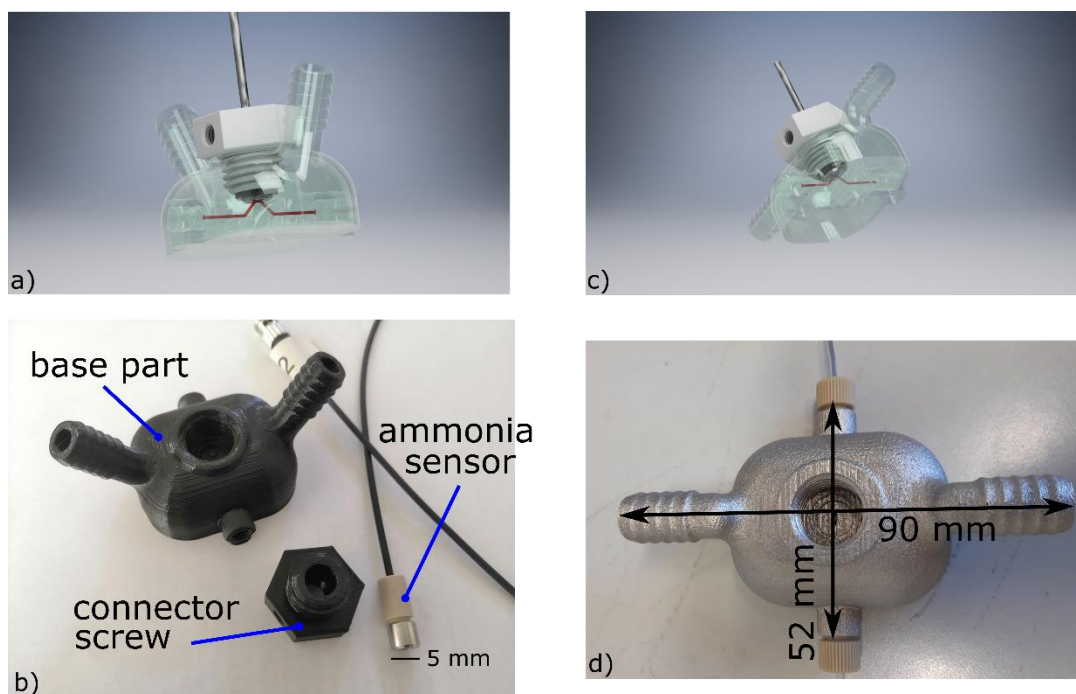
Four pictures showing the development of the 3D printed flow cell. a) first design, b) first design 3D printed with the PLA filament, c) final design, d) final 3D printed cell made of stainless steel.
